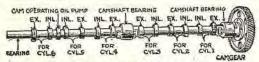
Six-cylinder cam shaft. All cams on one shaft.
